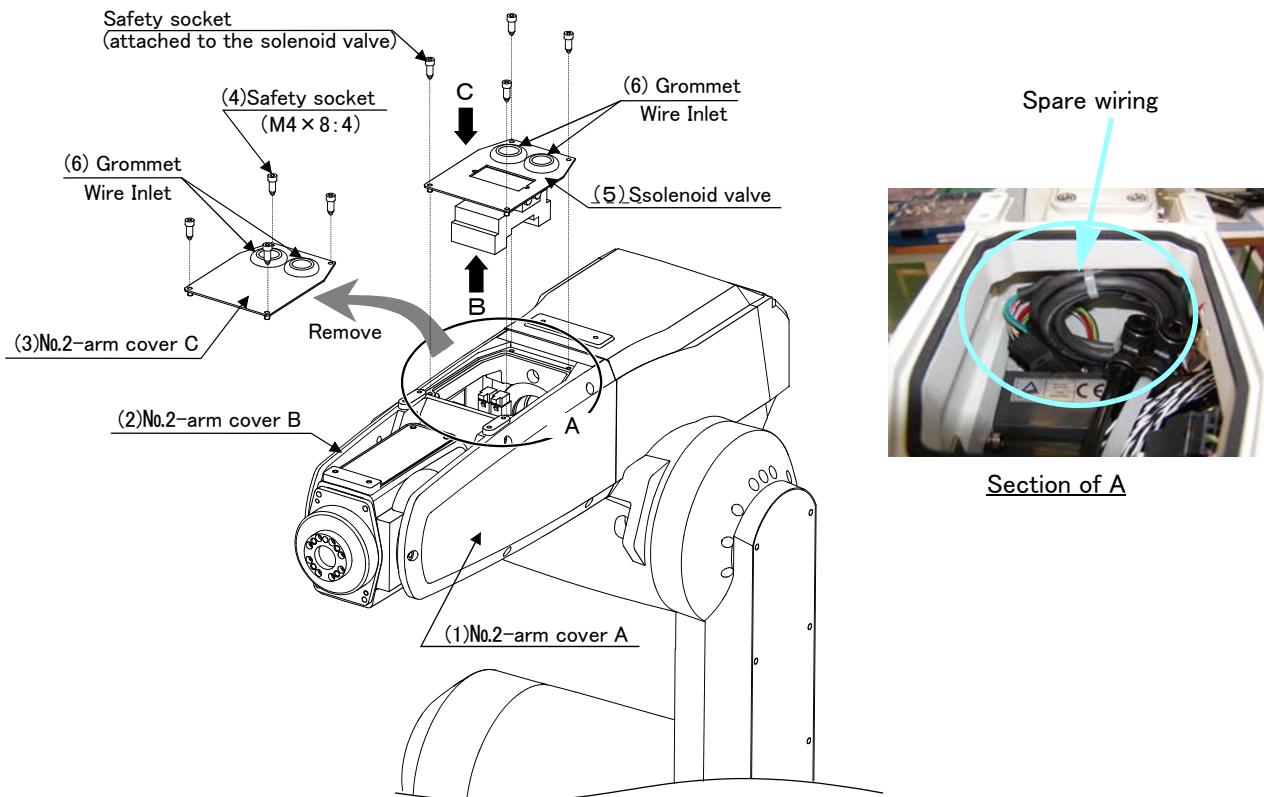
Drawer of spare wiring (Fore arm side)
